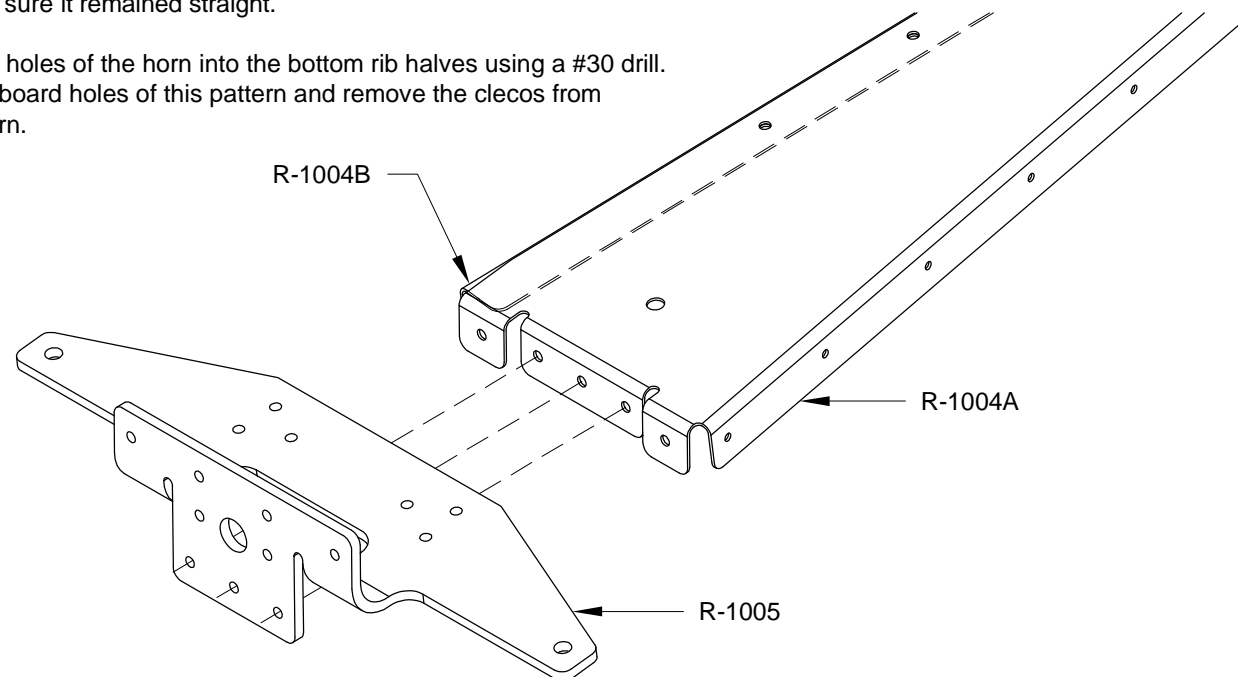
ATTACHMENT OF HORN TO BOTTOM RIB
